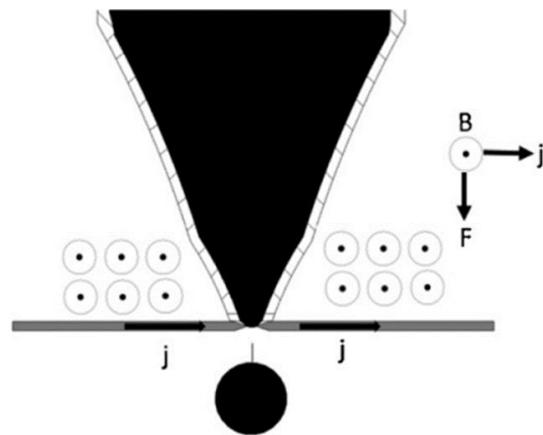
Ejecting chamber of a DoD MHD printer. [77]
